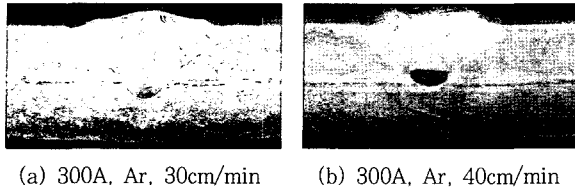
Illustration of weld bead profile between finger bead and tunnel bead
